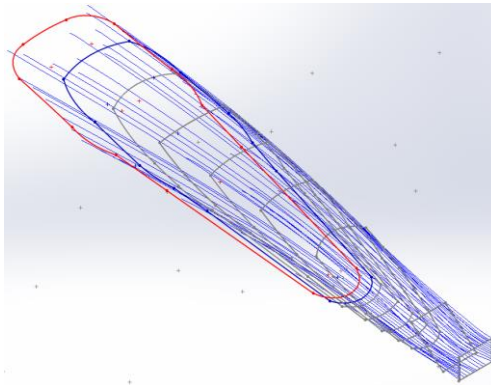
Isometric view of smoothed rings. These rings were used to generate a lofted surface. The leading ring (red) was removed to adjust streamline length.
